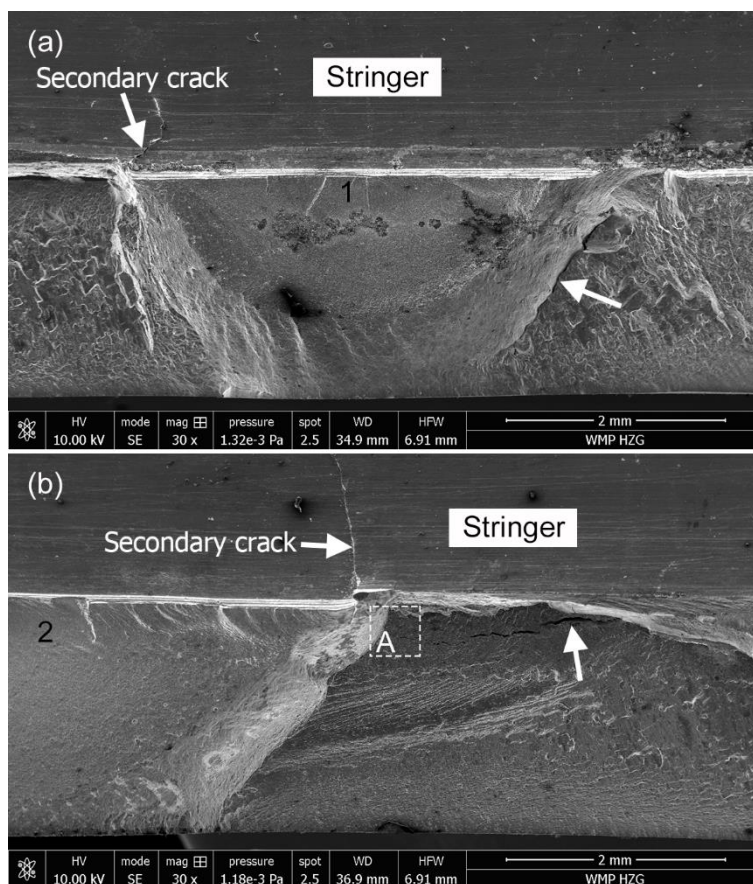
SEM images of the fatigue fracture surface for the NS-SP joint under high-cycles loading condition in the hoop-direction—(a) Fracture Surface 1 and (b) Fracture Surface 2
